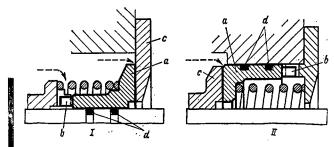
Axial-seal principle. The axial packing disc is placed on shaft (I) and in housing (II)
